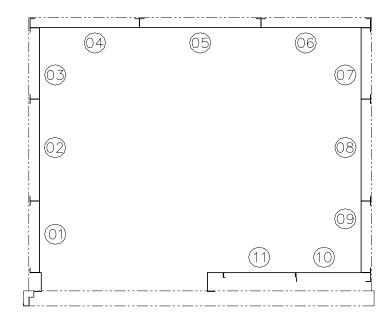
A. CAR PANEL AND ENTRANCE COLUMN ASSEMBLY
